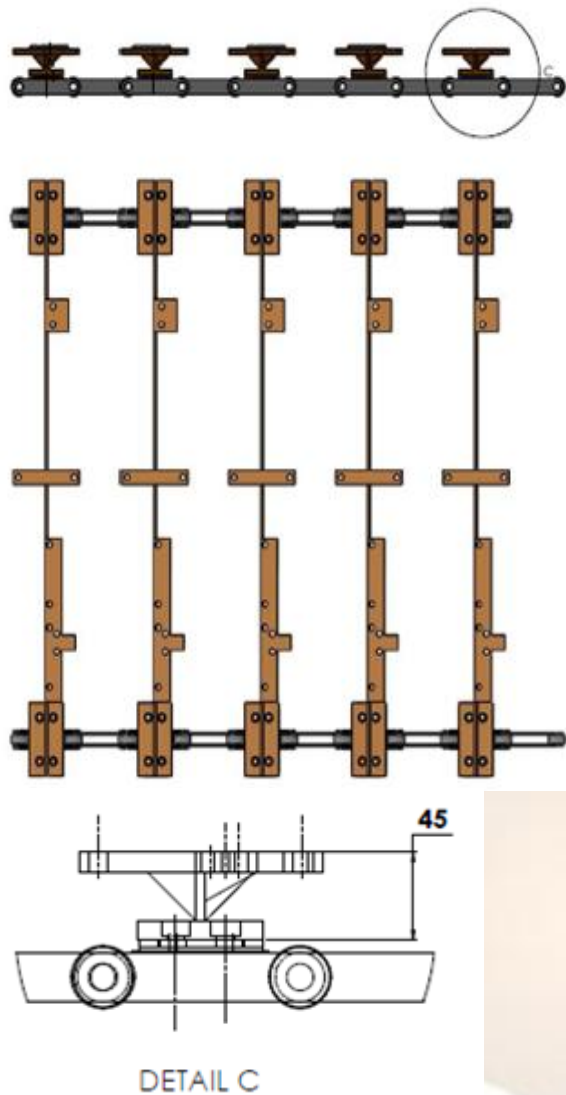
Mounting of fixture elements holding plates on chain conveyor
